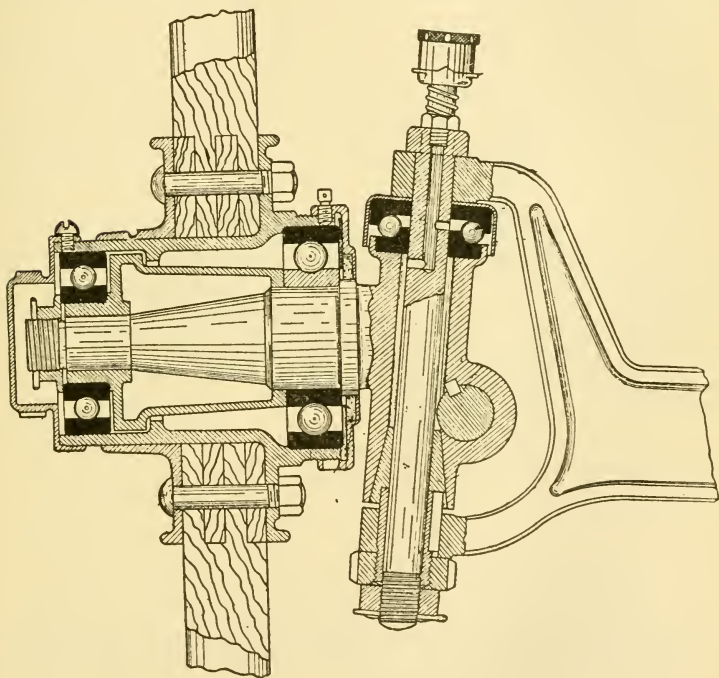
Front swivel axle of the Chadwick automobile; view showing the ball bearing. It will be noted that the steering axle bolt is not at right angles with the wheel axle. It is designed this way in order that shocks shall not be transmitted through the wheels to the gear, but will be absorbed in the axles.
